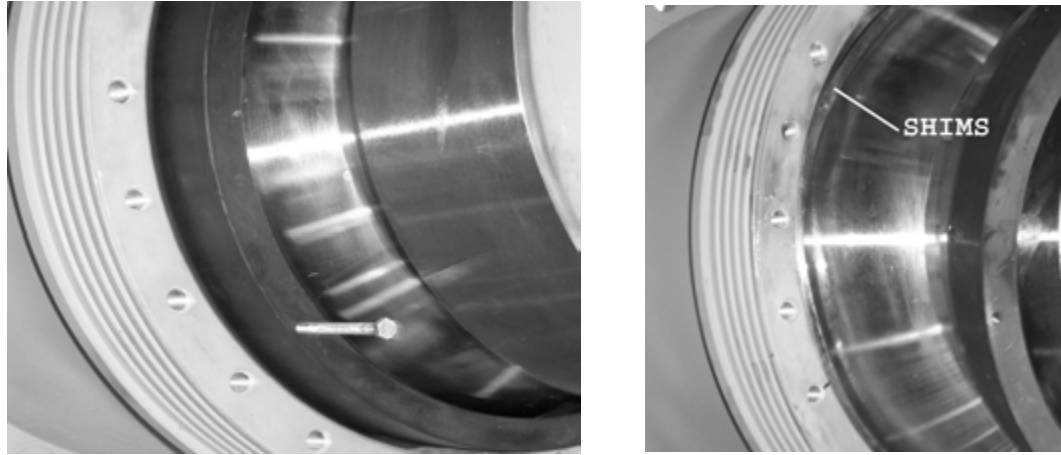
Remove the Retainer or *Wear Sleeve* (left), and Install Packing Shim Pack (right)
